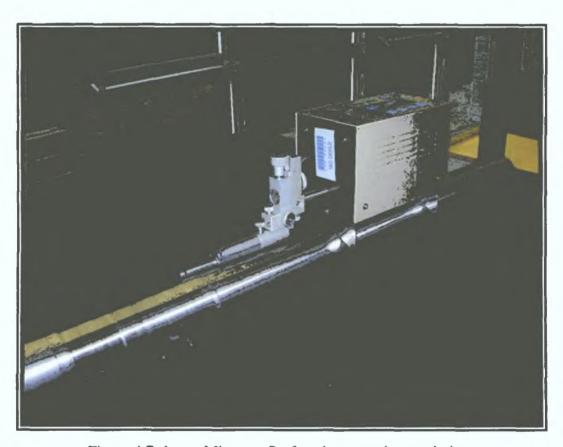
shown Mitutoyo Surftest is measuring workpiece
